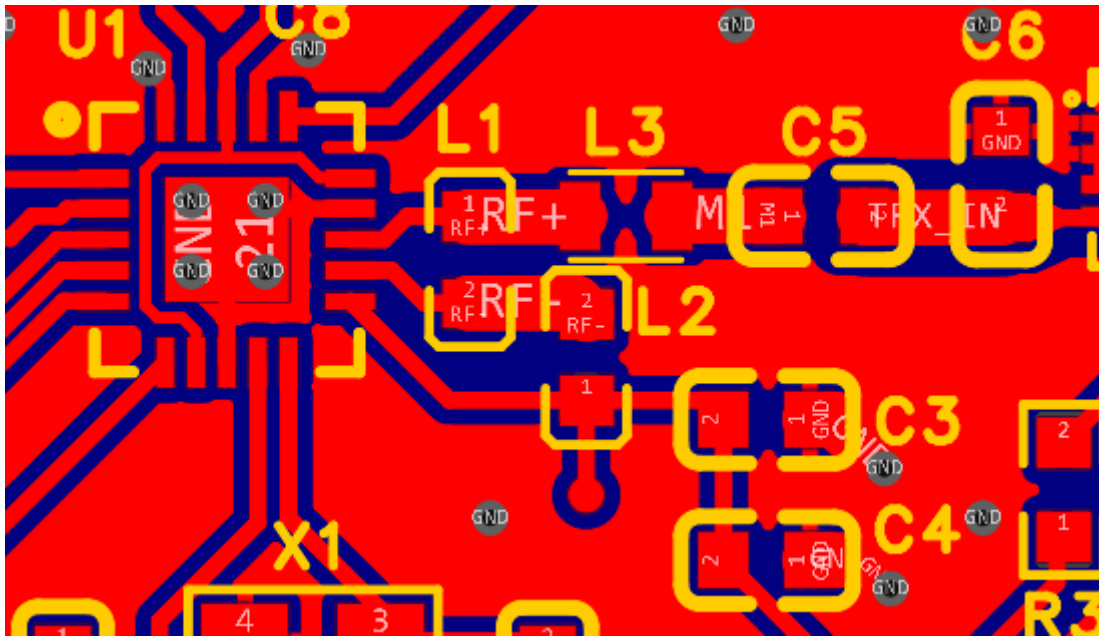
TT&C transceiver V2 transceiver PCB part snippets
